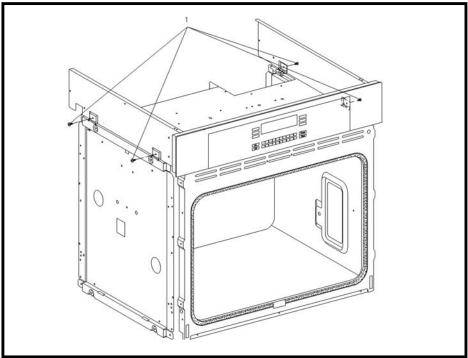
Upper (or Single Oven) Housing Retaining Screws
